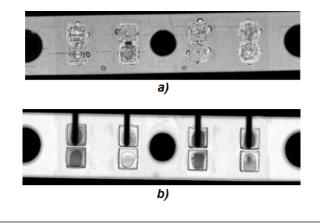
C-SAM images of die/Base plate joint of (a) TO-244 soldered and (b) TO-244 sintered.
